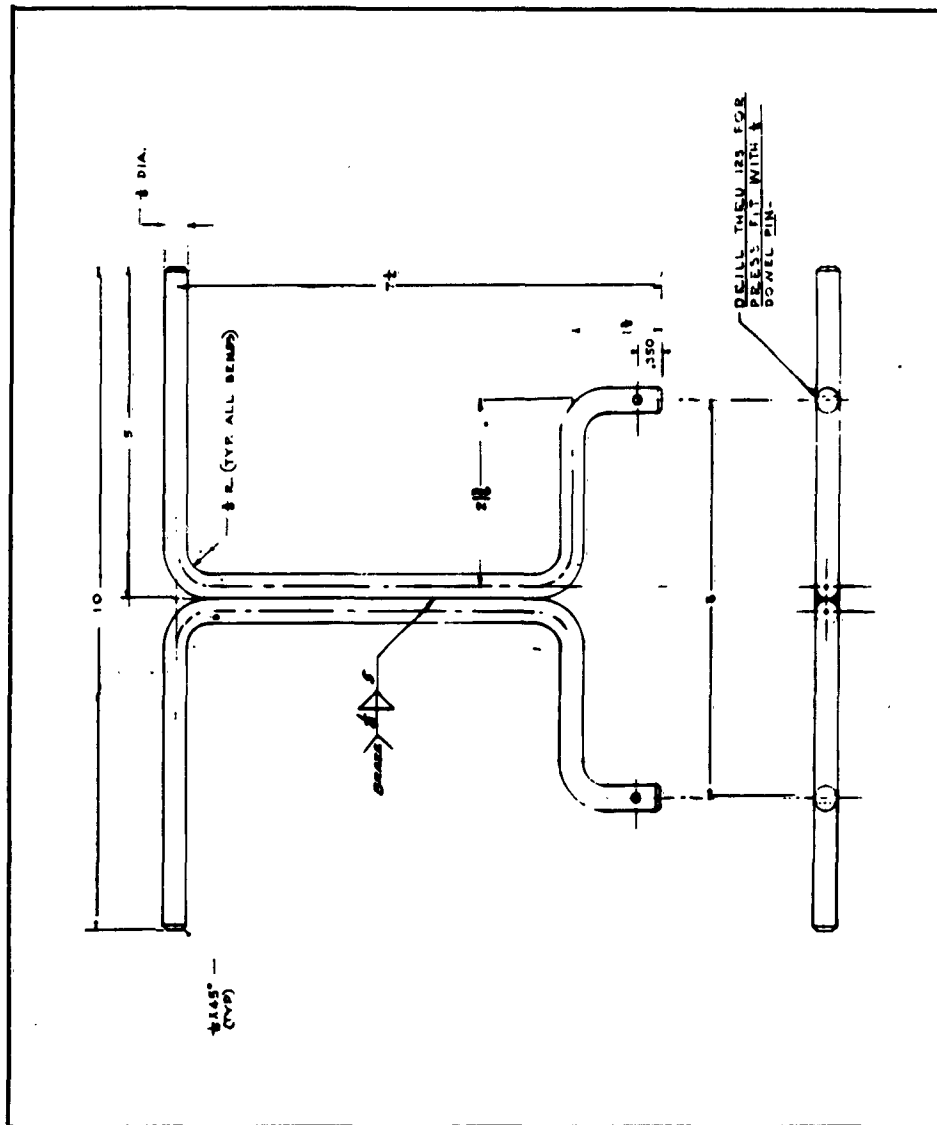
OOAMA Dwg No. 61033790 Handle - Wrench, Closure Plug, XM-51.
